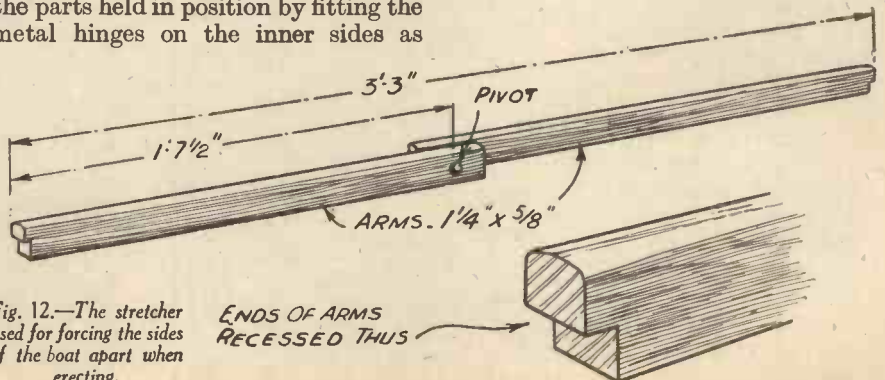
The stretcher used for forcing the sides of the boat apart when erecting.
